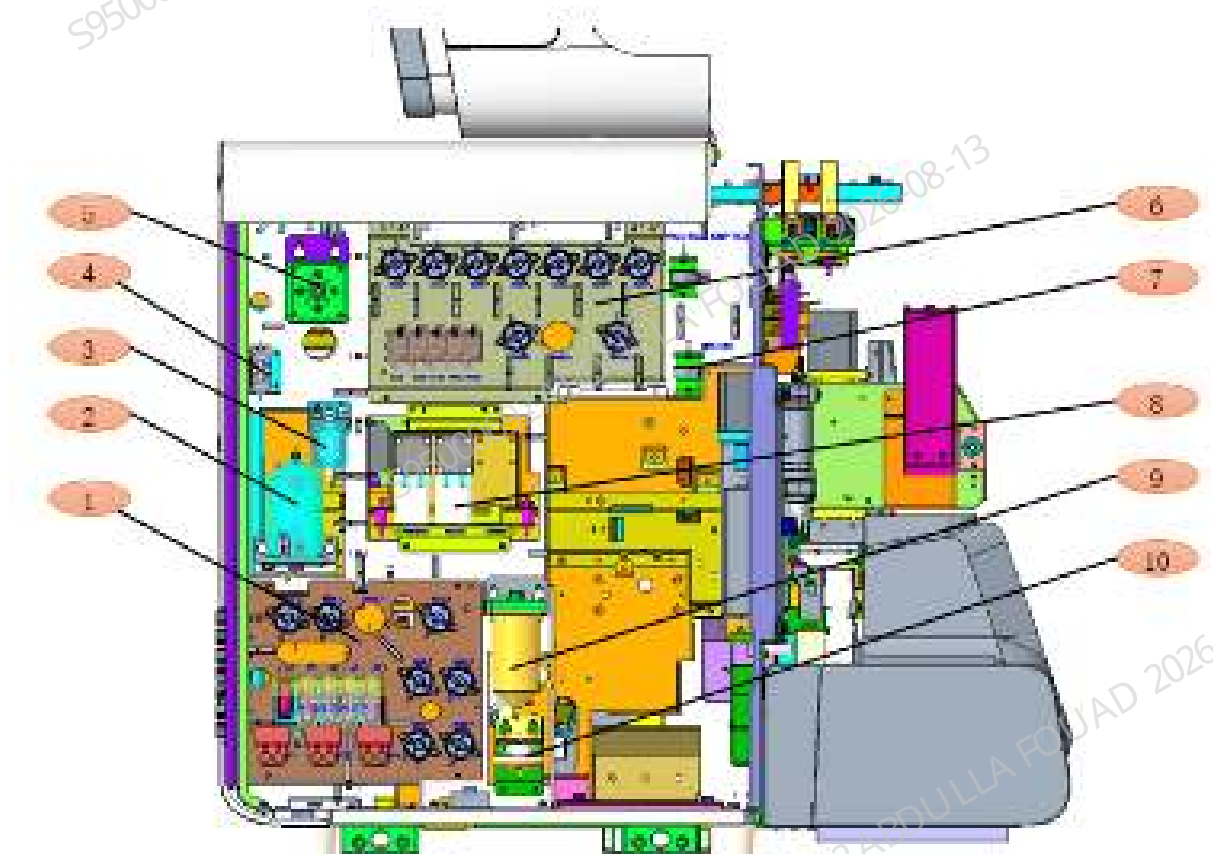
Components in the Right Side in the Analyzer (Assembly Panel Open)
